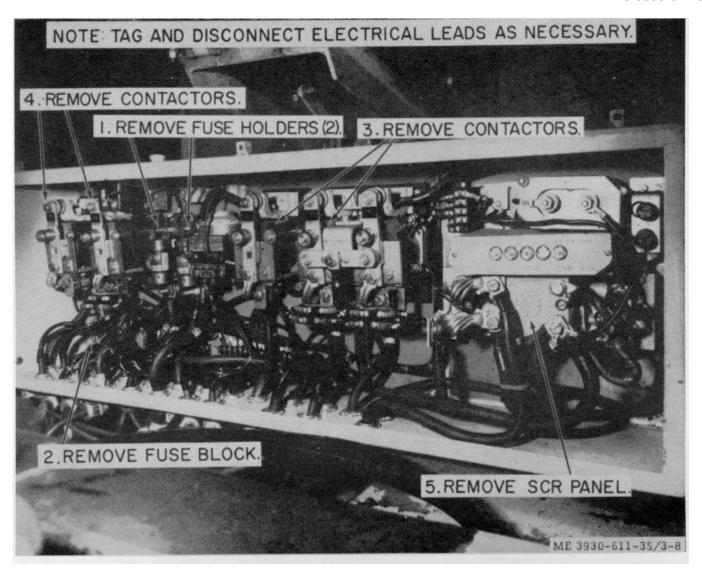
Contactors, SCR panel, fuse holders and terminal strips, and time delay relay, removal and installation.
